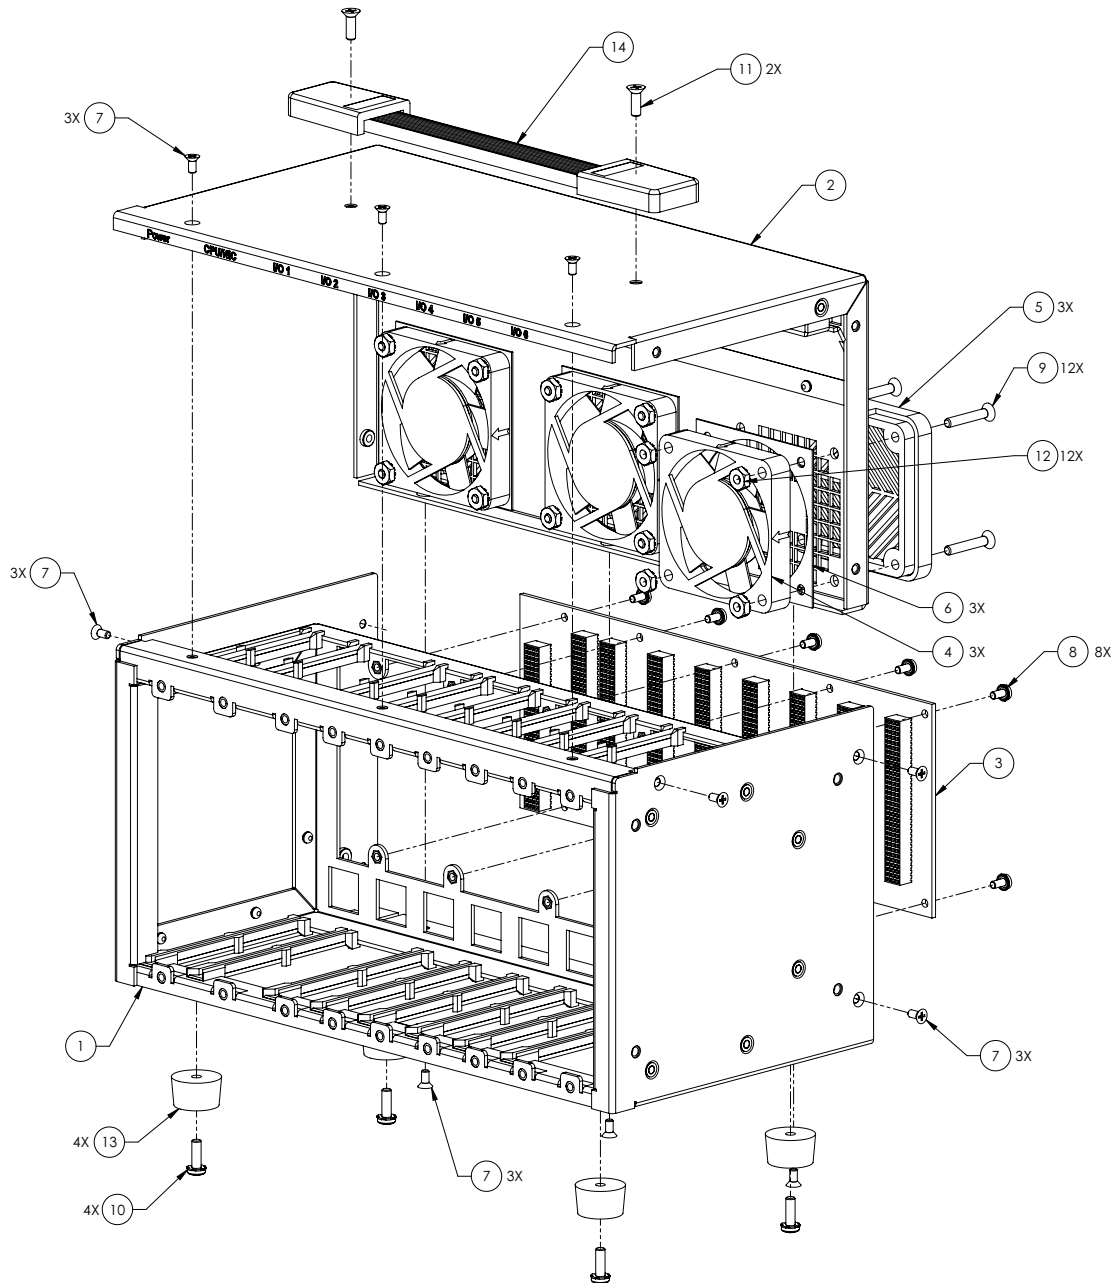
Typical HalfRACK Enclosure (Exploded View)
